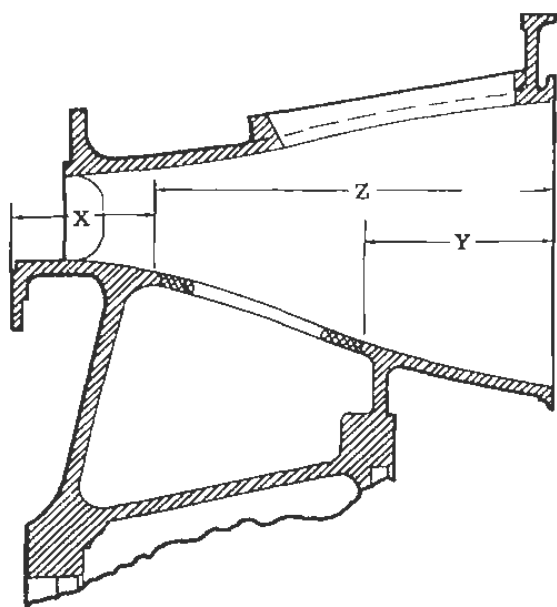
A. Inspection Limits for Compressor Rear Frame Cabin Take-off Ports
